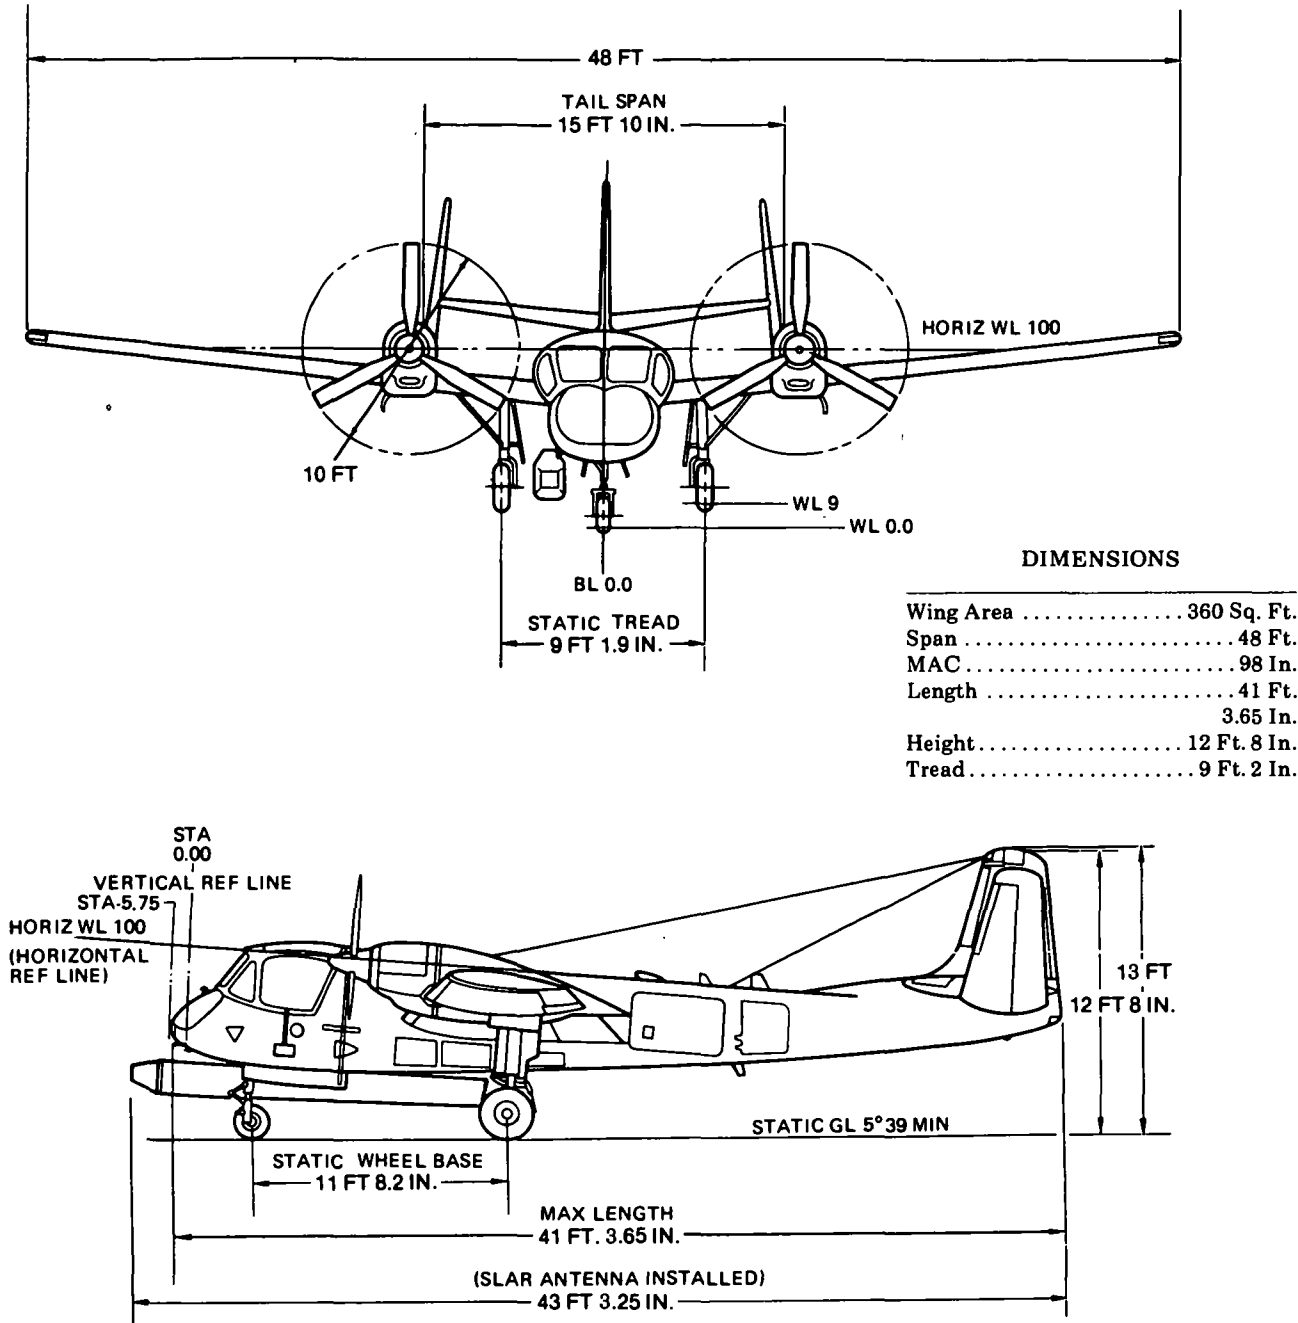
Principal Dimensions, OV-1D (Mohawk)
